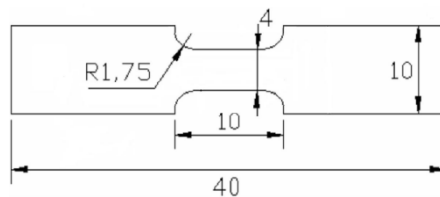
Dog-bone shape tensile specimen (all dimensions in mm)
